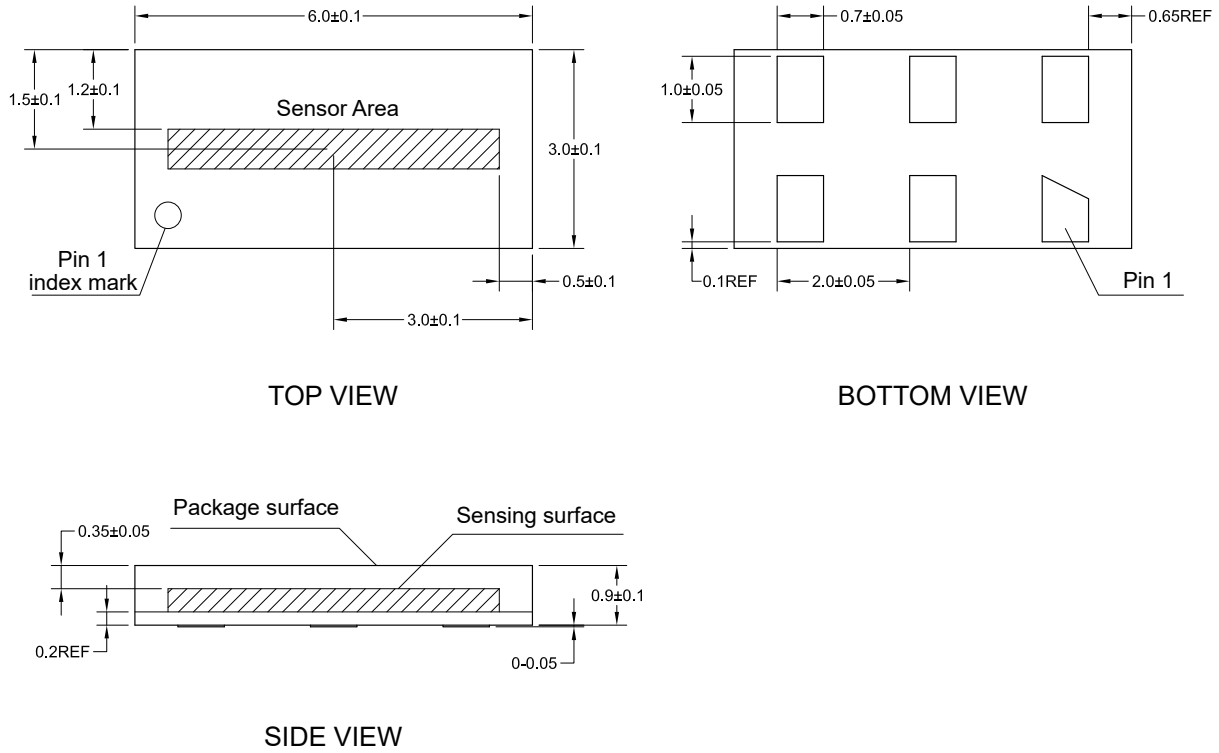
LGA6L (3×6×0.9) Package Drawing (unit: mm)
